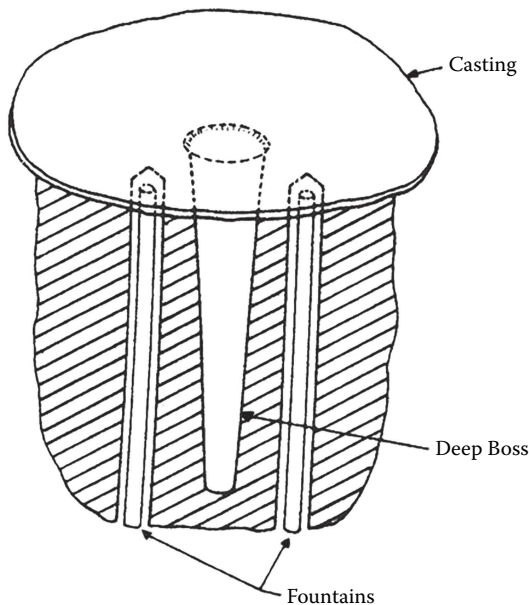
Possible fountain configuration for cooling a large deep boss on a thin-plate casting. For this case, the fountains should be treated as water lines cooling a strip casting
